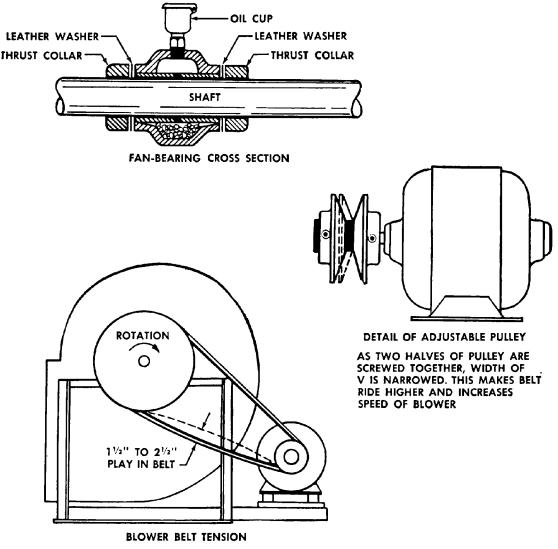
Fan bearing, pulley, and belt adjustments.
